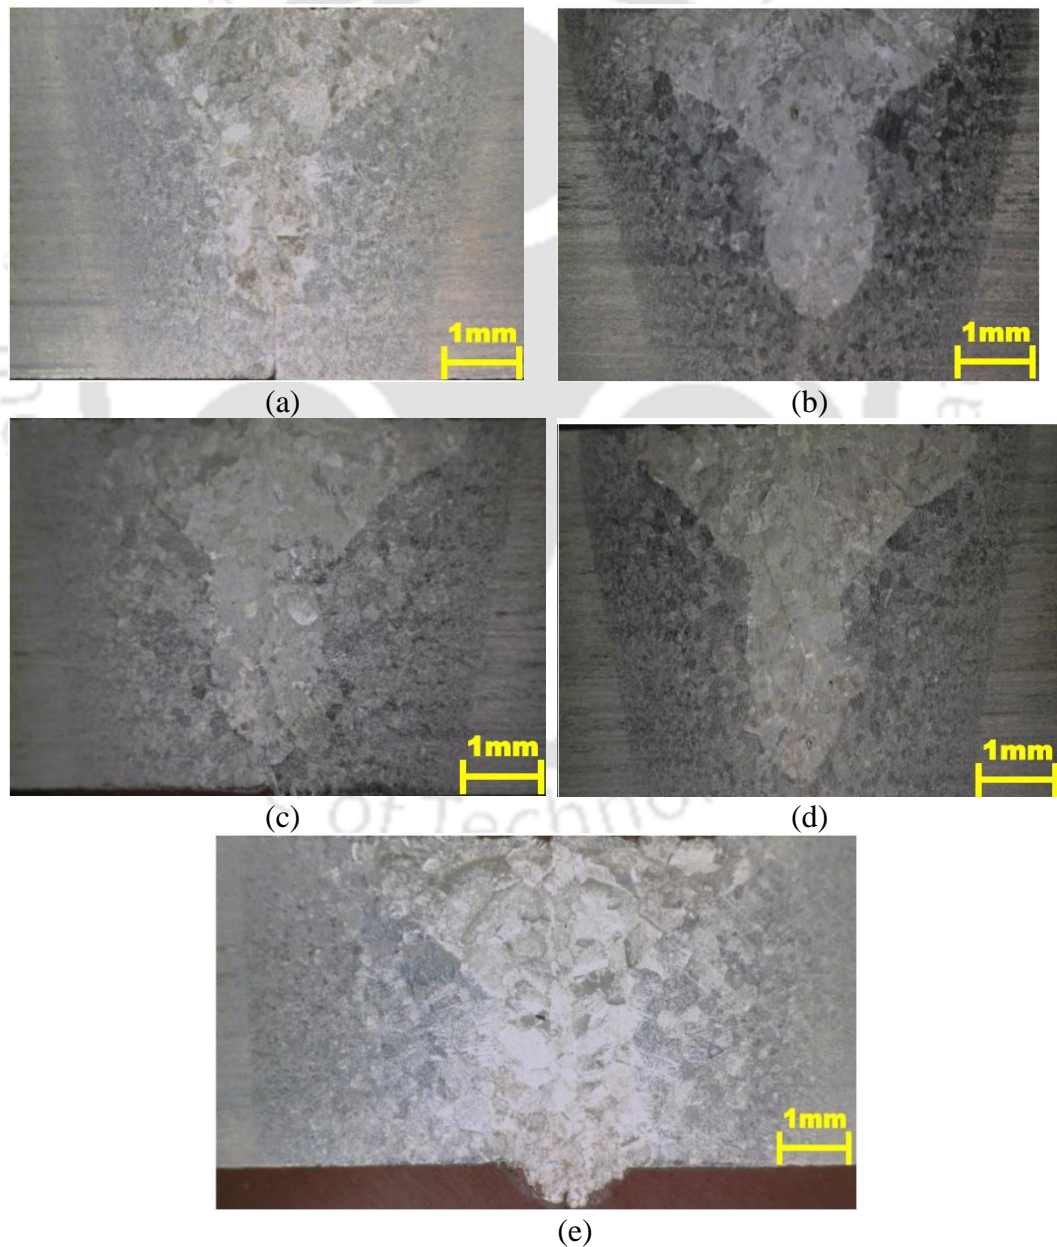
Weld bead shapes at different beam power (a) 1500 W, (b) 1600 W, (c) 1700 W, (d) 1800 W and (e) 1900 W
